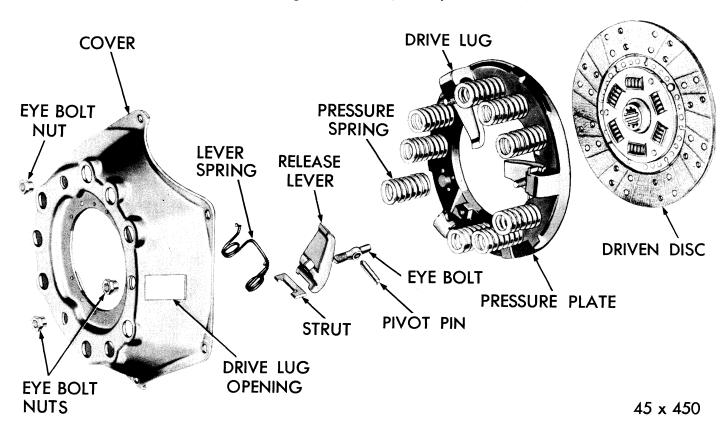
Borg & Beck Clutch (10 inch) Disassembled
